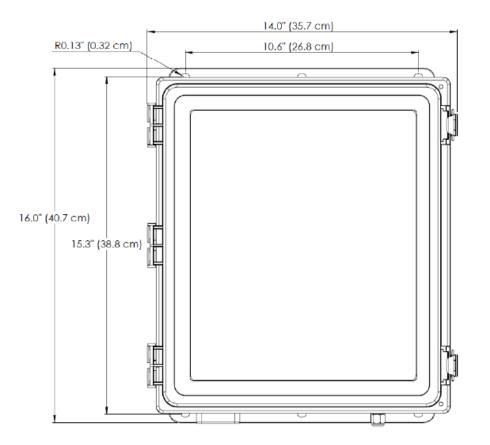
Dimensions of the enclosure and mounting brackets of the Model 106-M-MC6/MC3.
